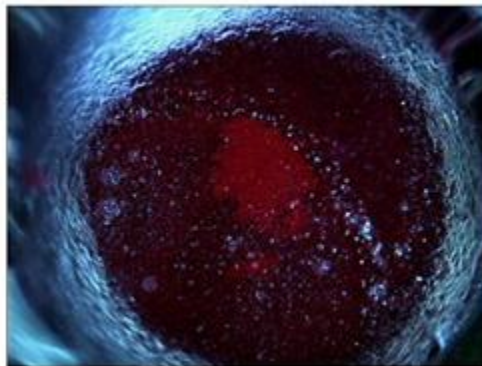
Optical photomicrograph of a failed solder ball surface after dye and pry (DnP) testing. This surface has fractured between the solder ball and BGA package pad (at the component side). The red color on the surface is from the dye intrusion that occurs prior to the mechanical prying.
